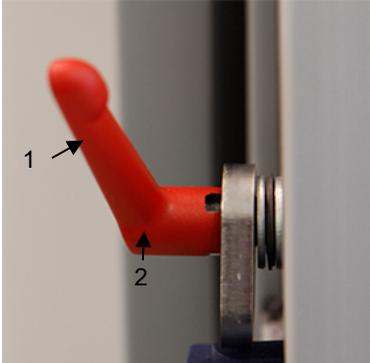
Clamping unit with clamping lever (1) and locking disc (2)
